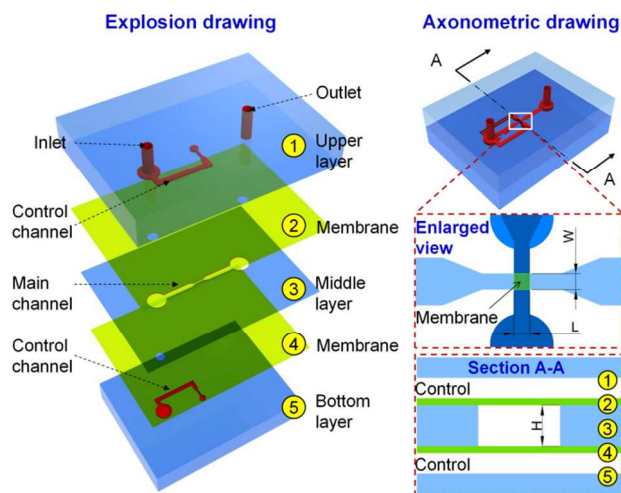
Schematic diagram of our passive flow regulator. The left figure is the explosion drawing which shows the five-layer-stacked structure. The right figure shows the axonometric drawing, which includes an enlarged view and a cross-sectional view of crossed channels.
